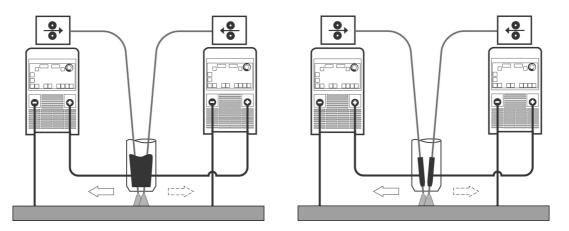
Twin-wire welding with a common contact tube (left) and tandem welding (right) in which the two contact tubes are electrically insulated from one another
